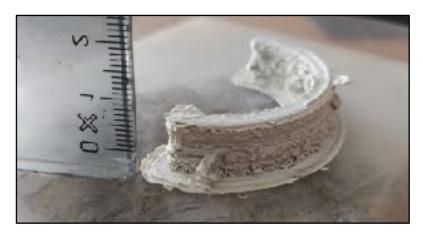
The v1Swanky.gcode 3D printed speciment
